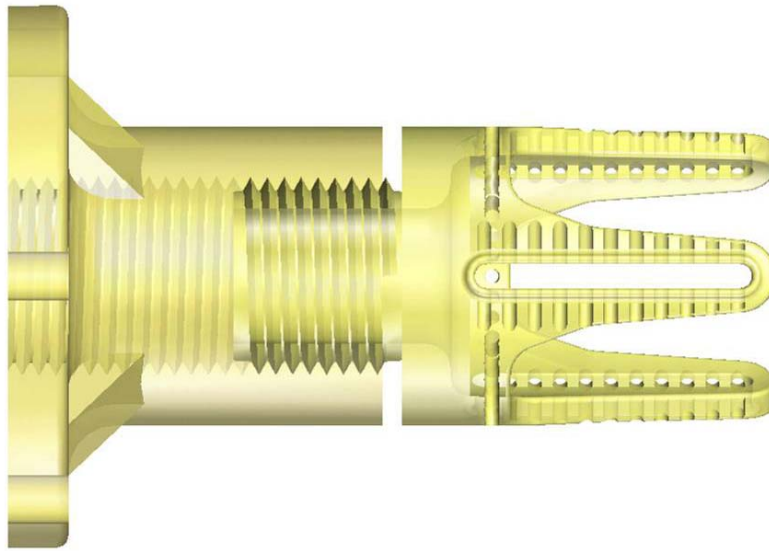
Tissue engineered heart valve holder assembly showing the stent and base
